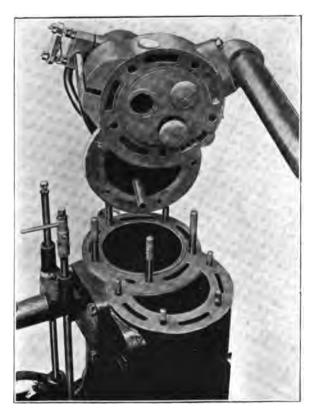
Hein Oil Engine, with cylinder head removed.
